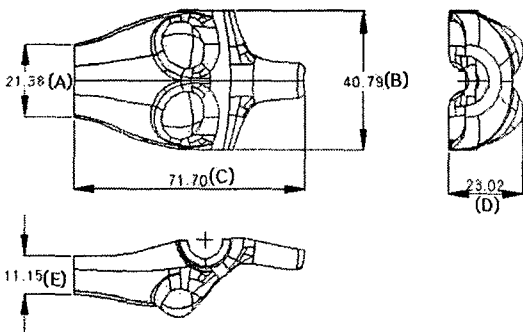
(a) Dimension accuracy analysis of the designed dimension
